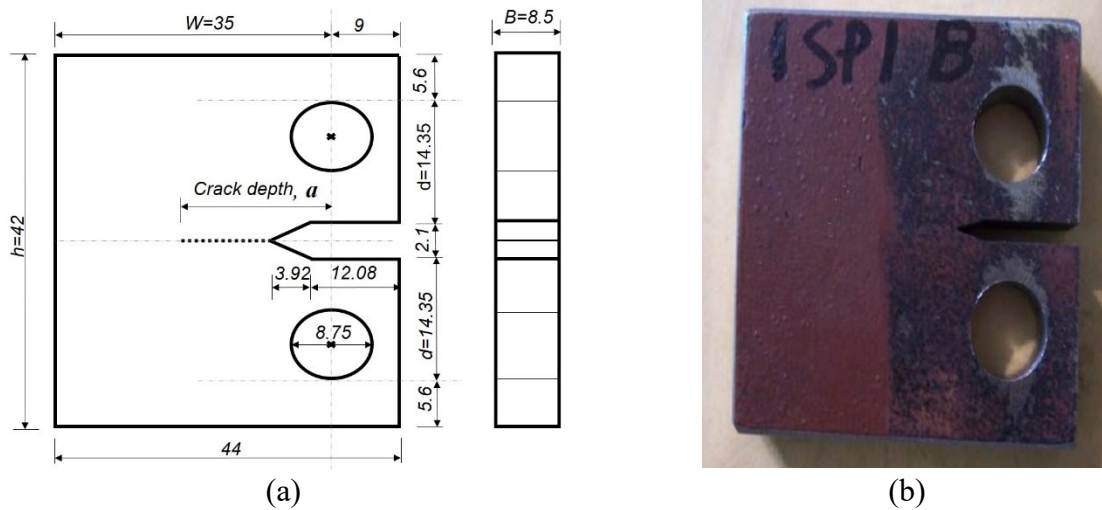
(a) Geometric details of the CT specimen: flat view (left) and sectional view (right) and (b) CT specimen used in experiment [44] (Note: All dimensions are in *mm*)
